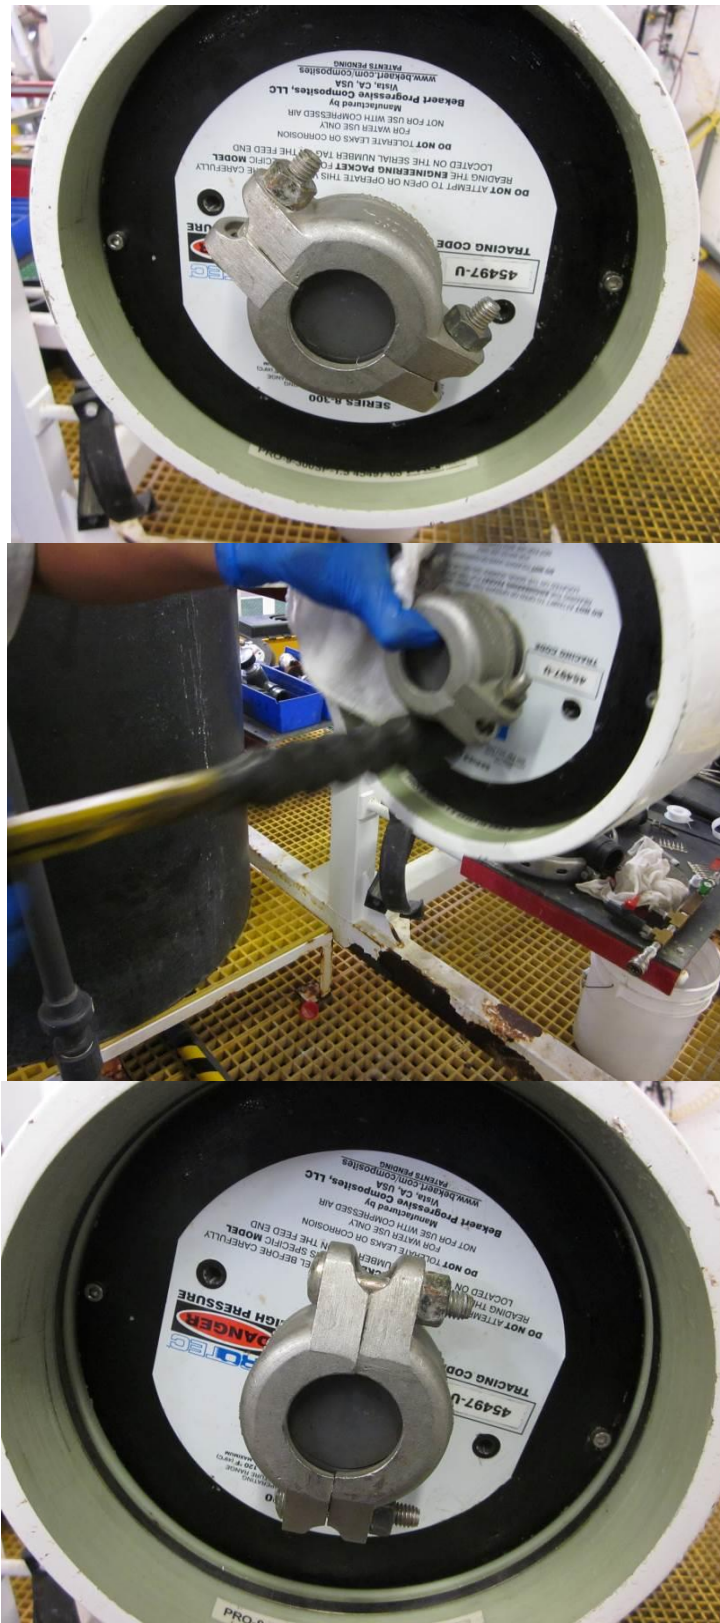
The end plate will need to be pushed in to allow for the locking rings to be installed. If the end plate is difficult to insert, the handle of a hammer may be used to assist as shown in the pictures above. Be careful when inserting plate to not damage any components.
